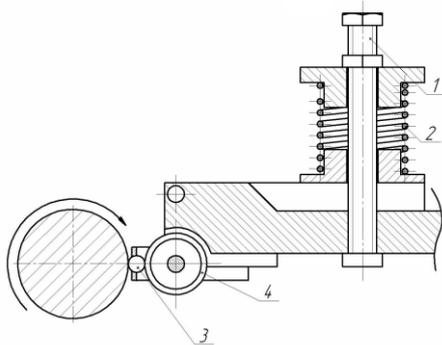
The scheme of the unit for surface plastic deformation: 1 - adjusting screw; 2 - spring; 3 - ball; 4 - bearing
